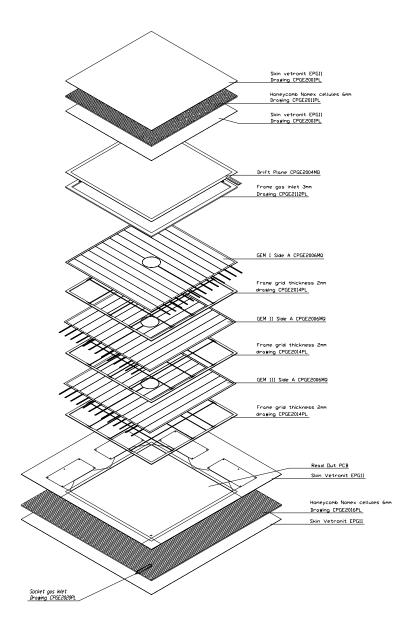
shows an exploded view of the triple-GEM detector for Compass.
